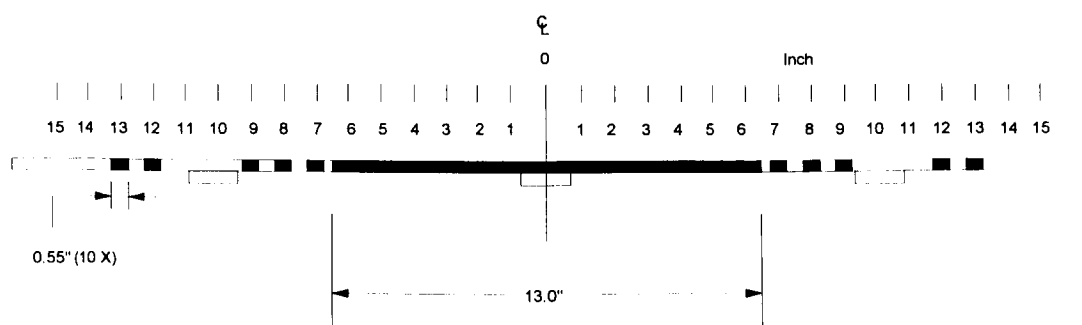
Two-bay skin crack with multiple collinear cracks and an intact central strap.
